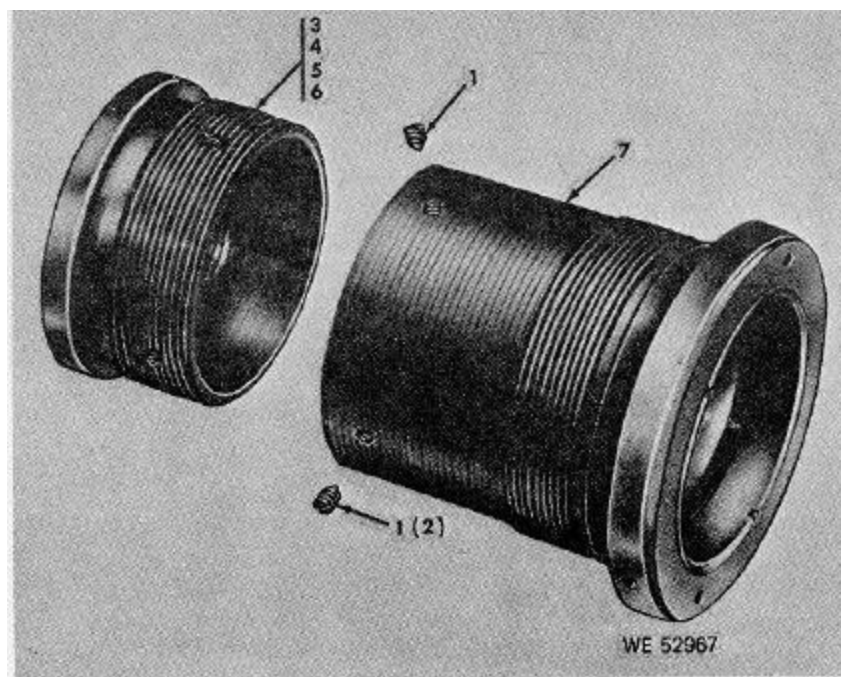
Eyepiece assembly 7687266 (M12A7C and M12A7K), 8248176 (M12A7H), 8570118 (M12A7Q), and 8289215 (M12A7S) --partial exploded view.
